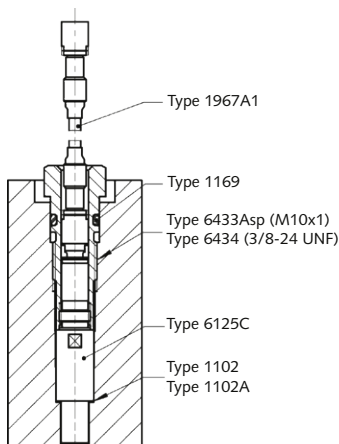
Mounting sensor Type 6125C... with mounting sleeve
